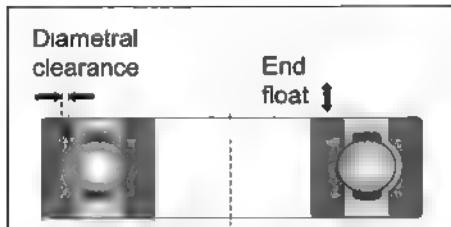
A cross-section of a ball bearing showing exaggerated diametral clearance and end float.
